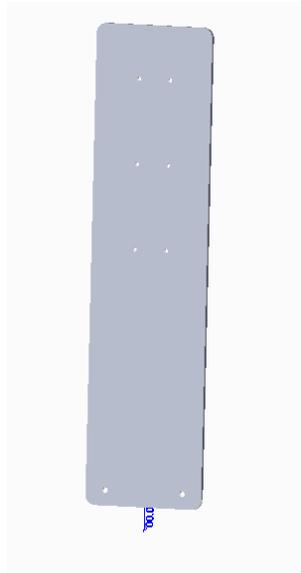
b) CAD of super omniphobic coating apparatus mount converted to sheet metal and unbent
